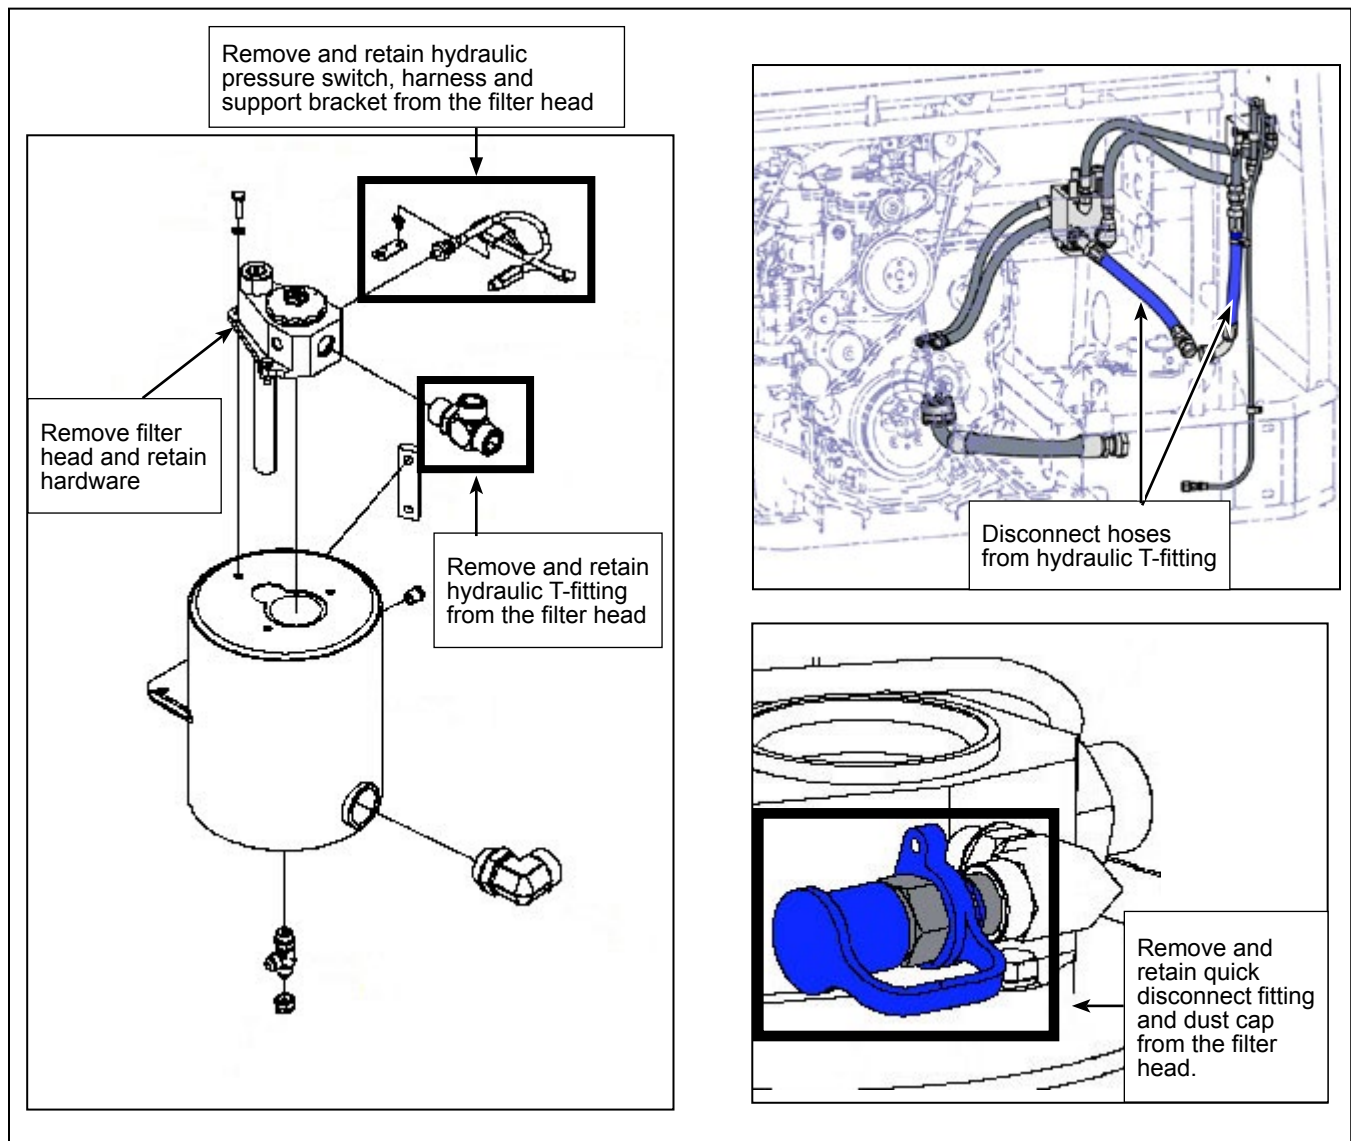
Hydraulic Parts to Retain for Filter Head and Installation of New Hose
